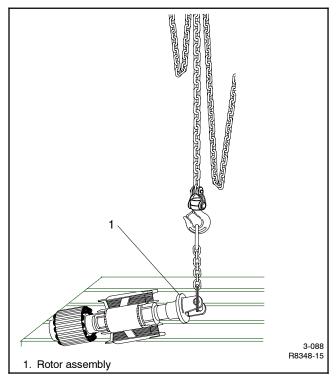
Lowering Rotor (20-300 kW rotor assembly shown)
